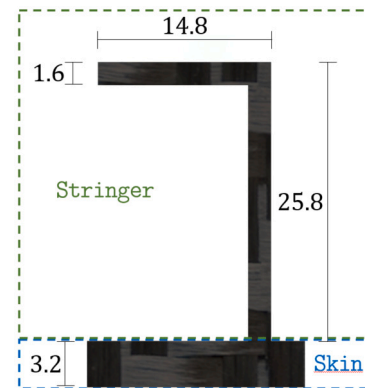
Stringer and skin interface - The figure shows the geometry of the stringer and the thickness of the skin (all dimensions are expressed in mm).
